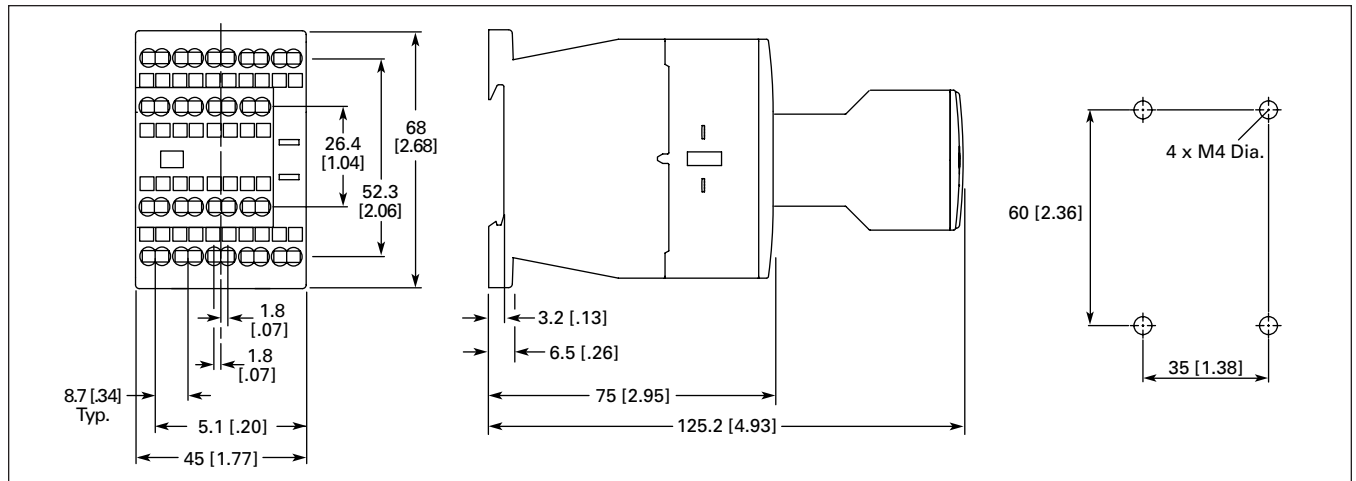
Frame B, XTCEC007B – XTCEC012B Contactors with Spring Cage Terminals (7 – 12A) — Approximate Dimensions in mm [in]
